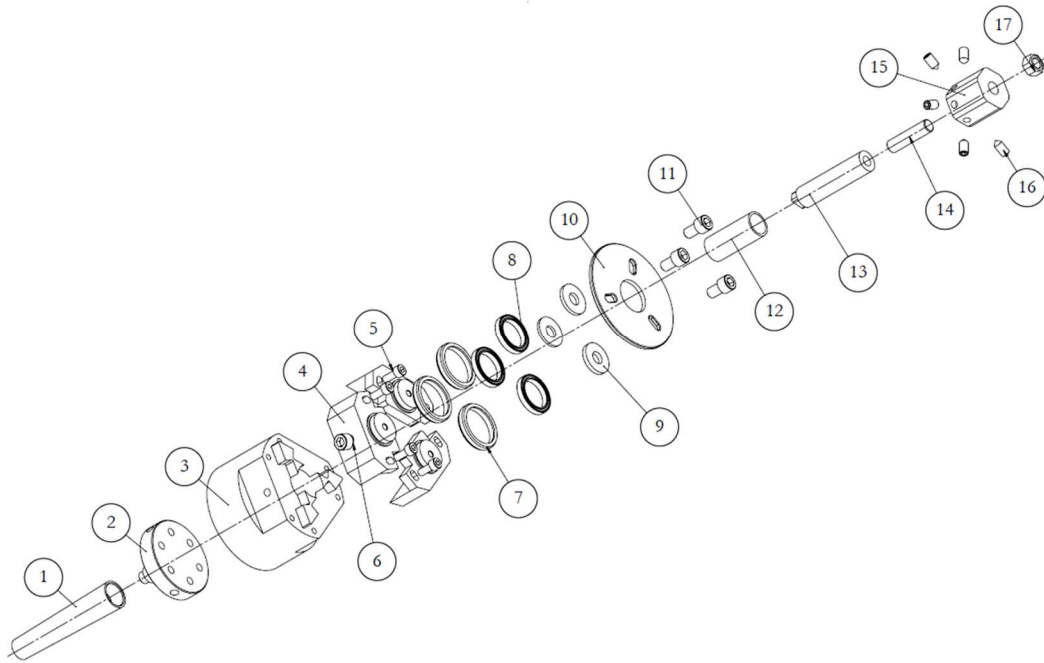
Exploded-view of the traditional backward tube flowforming setup.
